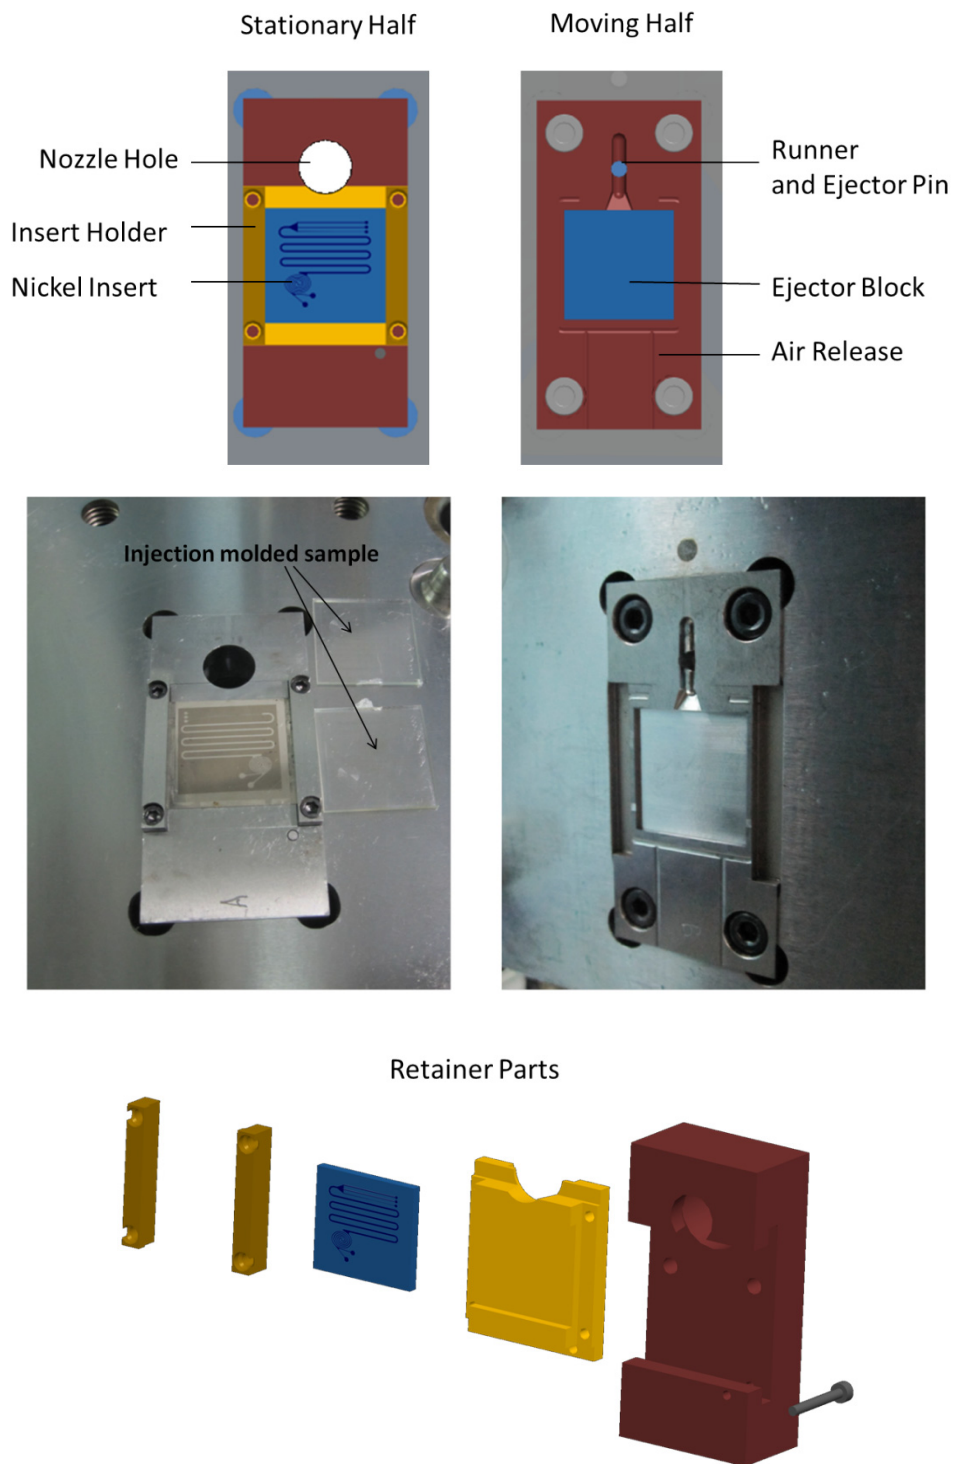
Ni insert retainer showing the clamping mechanism and the different parts
